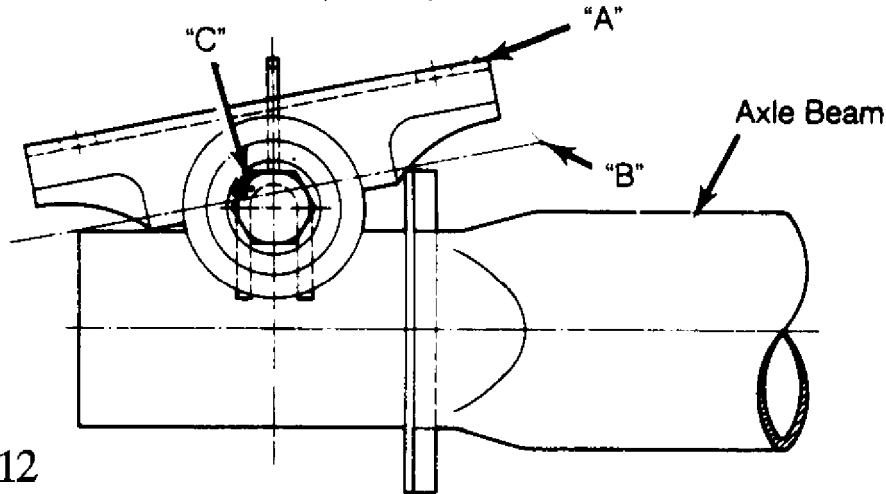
Correct Alignment of Axle Beam Mounting Pad
